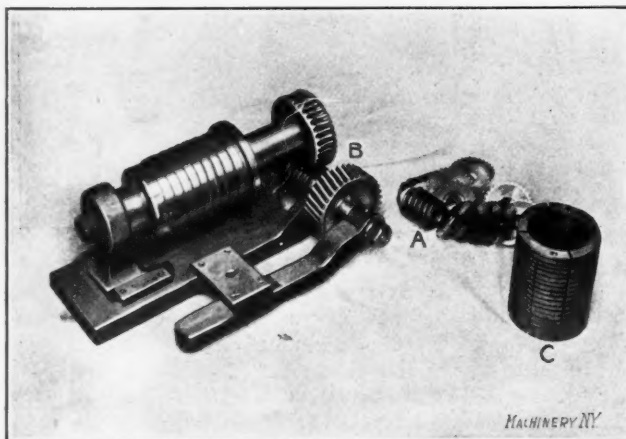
Milling Fixture and Tools for Cutting off Piston Rings
